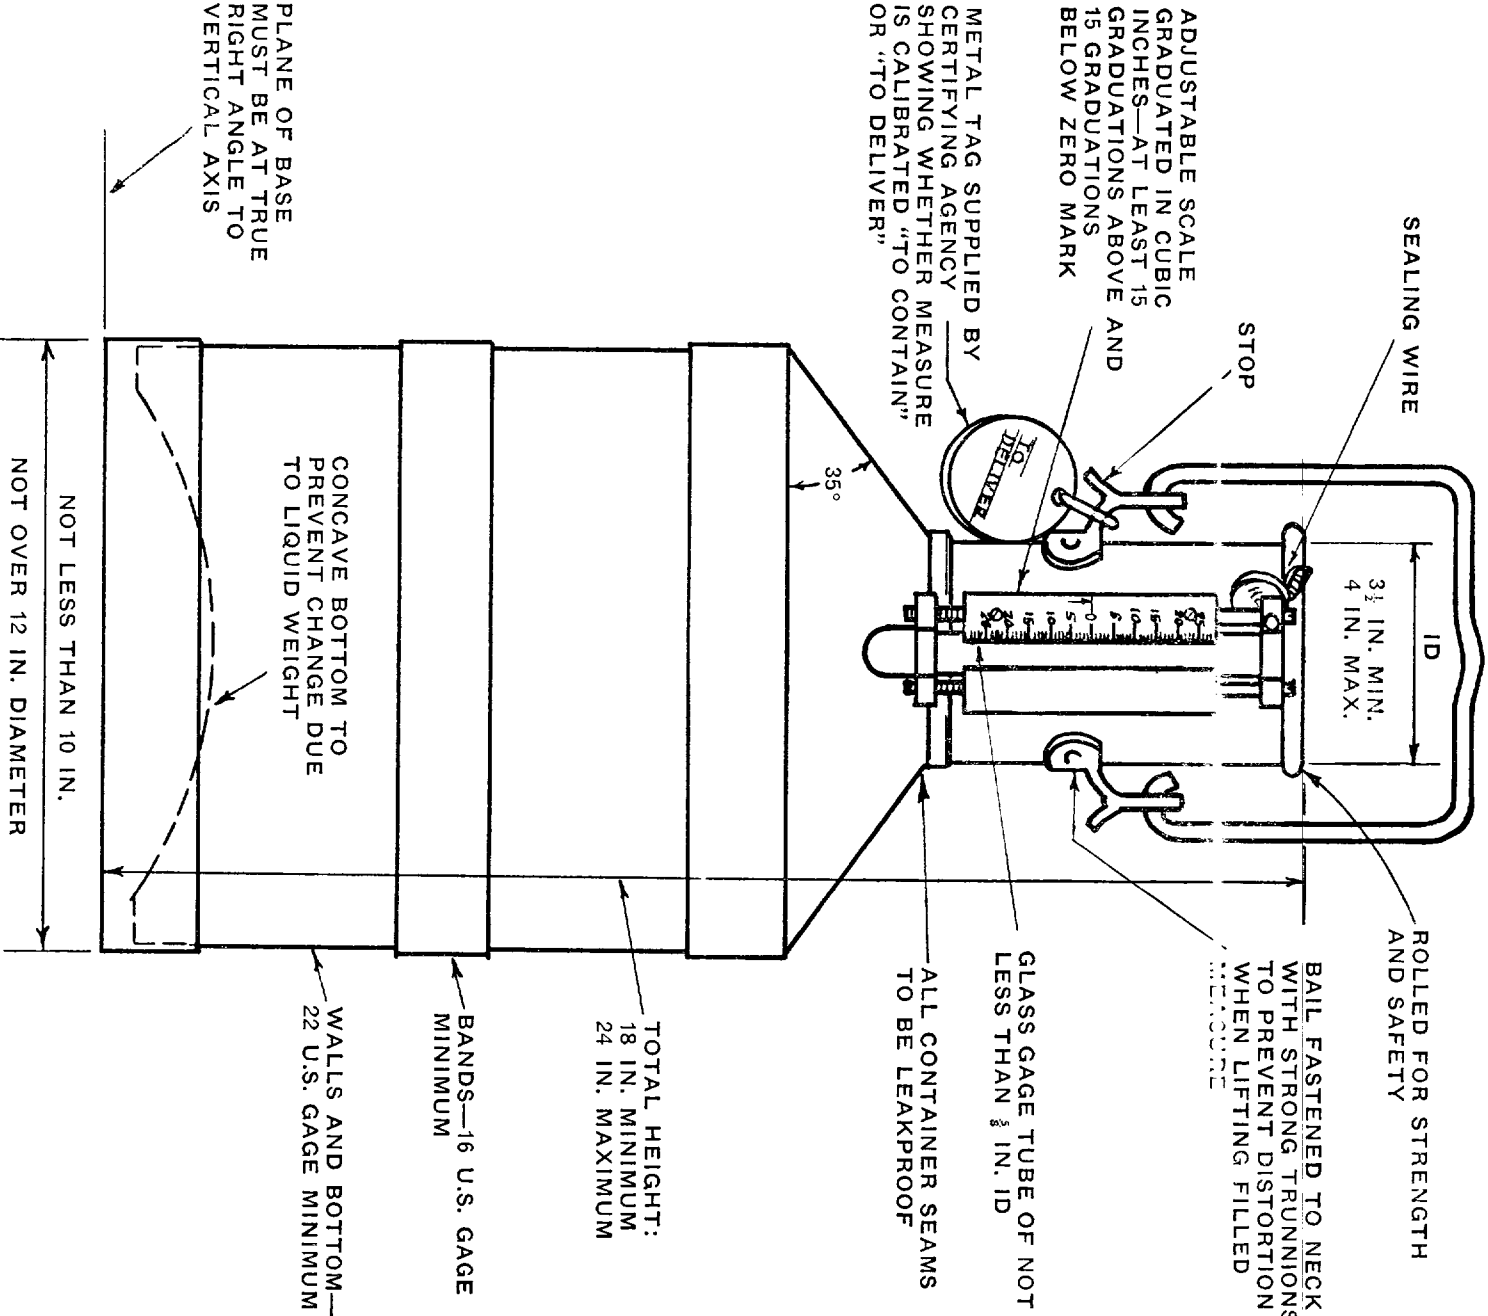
Typical 5-Gal Test Measure (See Alternate Gage Glass Design, Fig. 27).
